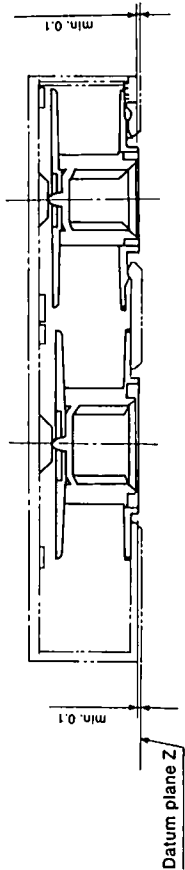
Datum Places and Supporting Surfaces of Small Cassette
